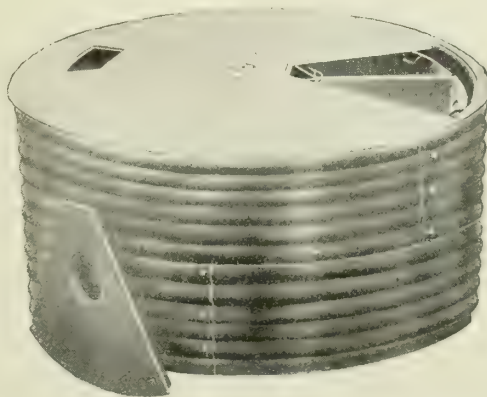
RECEIVER ASSEMBLED WITH REMOVABLE COVER AT SIDE
